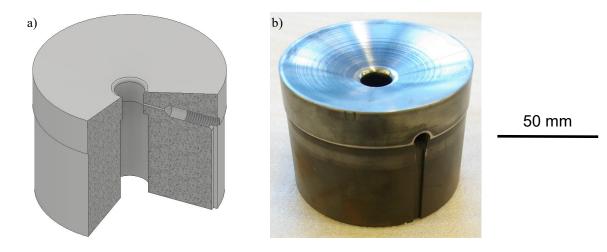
Illustrations of the die geometry: a) CAD model and b) photograph.
